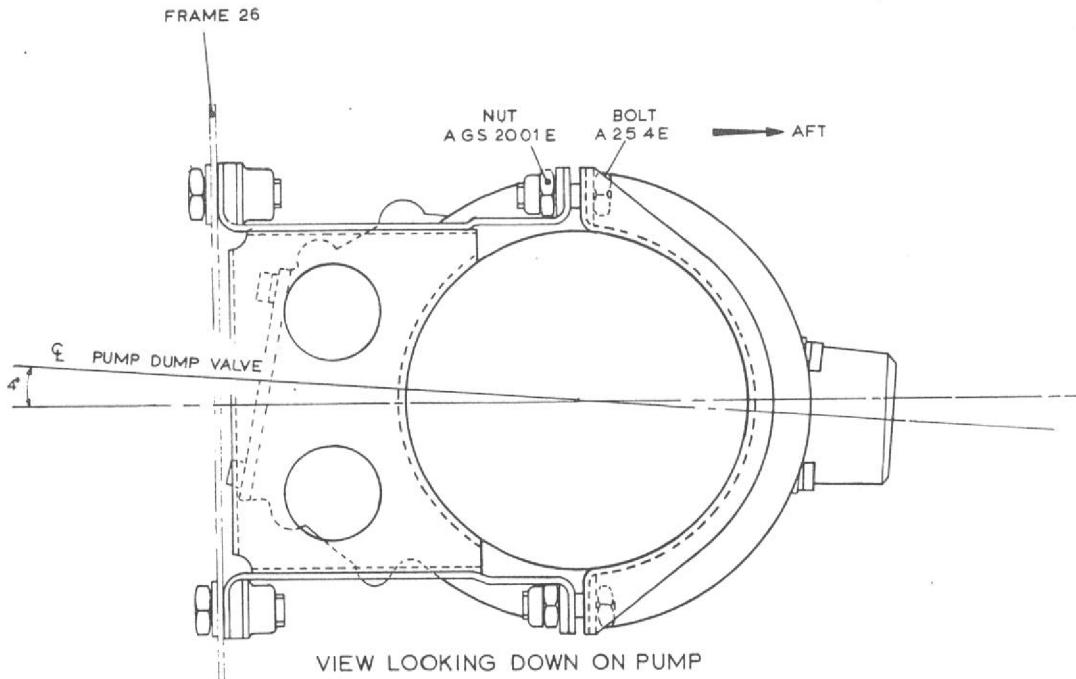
Motor, air blower and fuel pump assembly mounting brackets.
